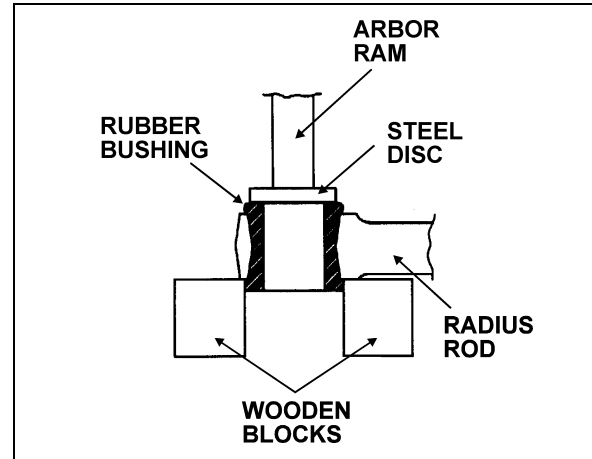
RADIUS ROD BUSHING REMOVAL 16011
